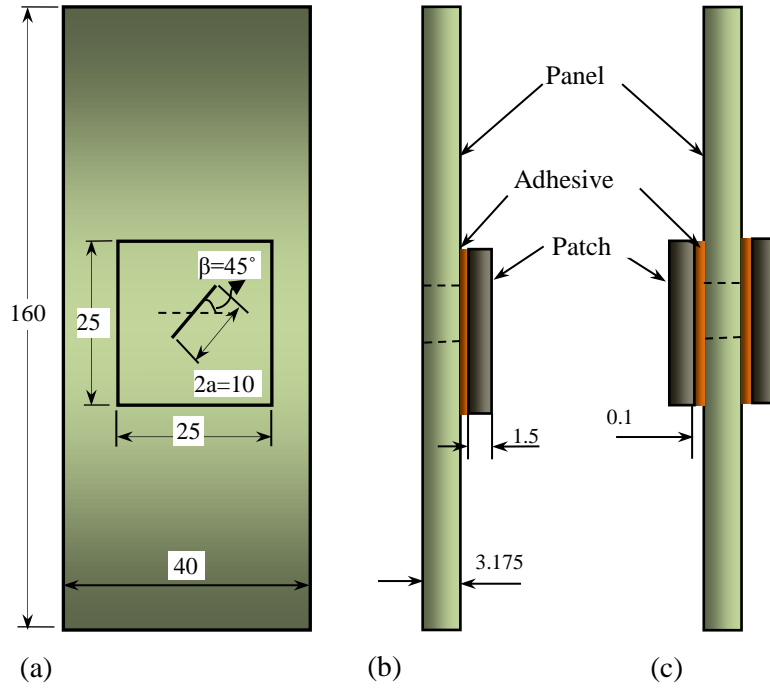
Geometry of the repair model considered (a) front view (b) side view of single sided patch (c) side view of double sided patched model (All dimensions are in mm)
